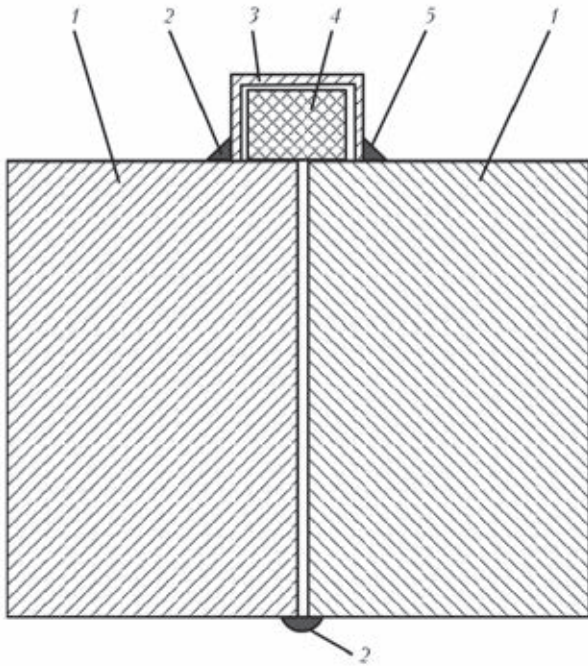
AVB with wide gaps: 1 – parent metal; 2 – sealing welds, 3 – sealed feeder; 4 – brazing alloy.
